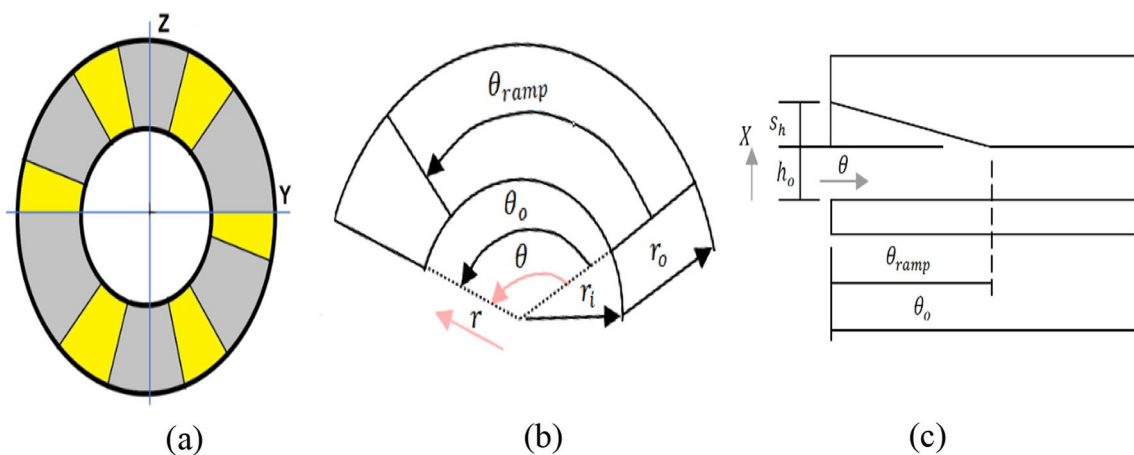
a Thrust bearings fixed geometry, (b) and (c) variables of thrust bearing
